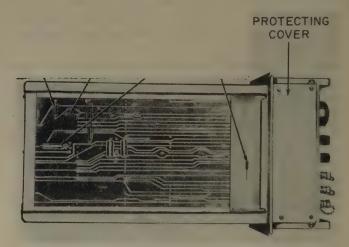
Interconnecting plate on bottom of cooling chassis.
